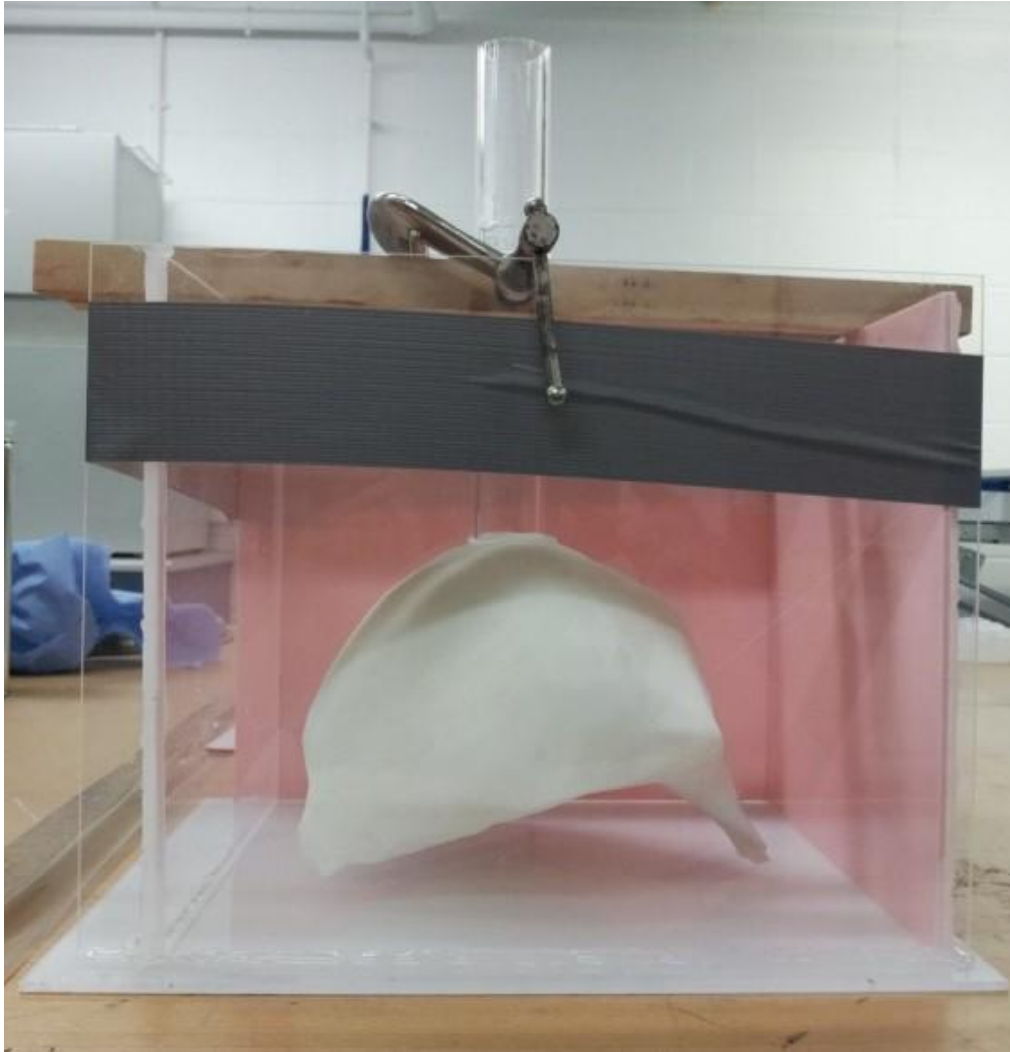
Assembly for making 2-part silicone rubber mould.
